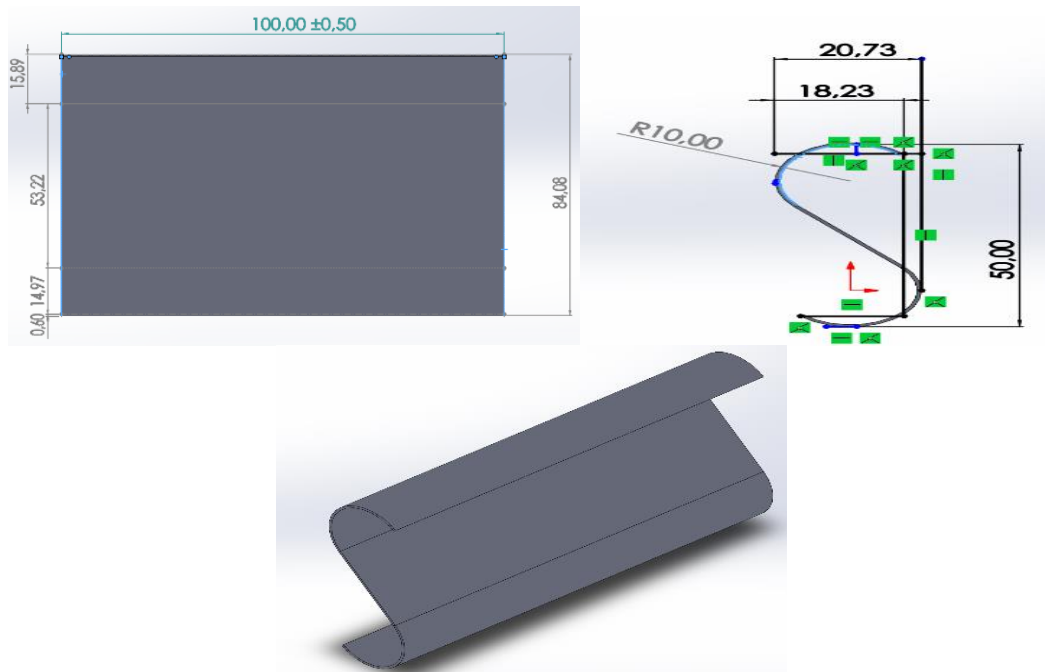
S-core dimension selected for R10mm and sheet dimensions before and after bending
